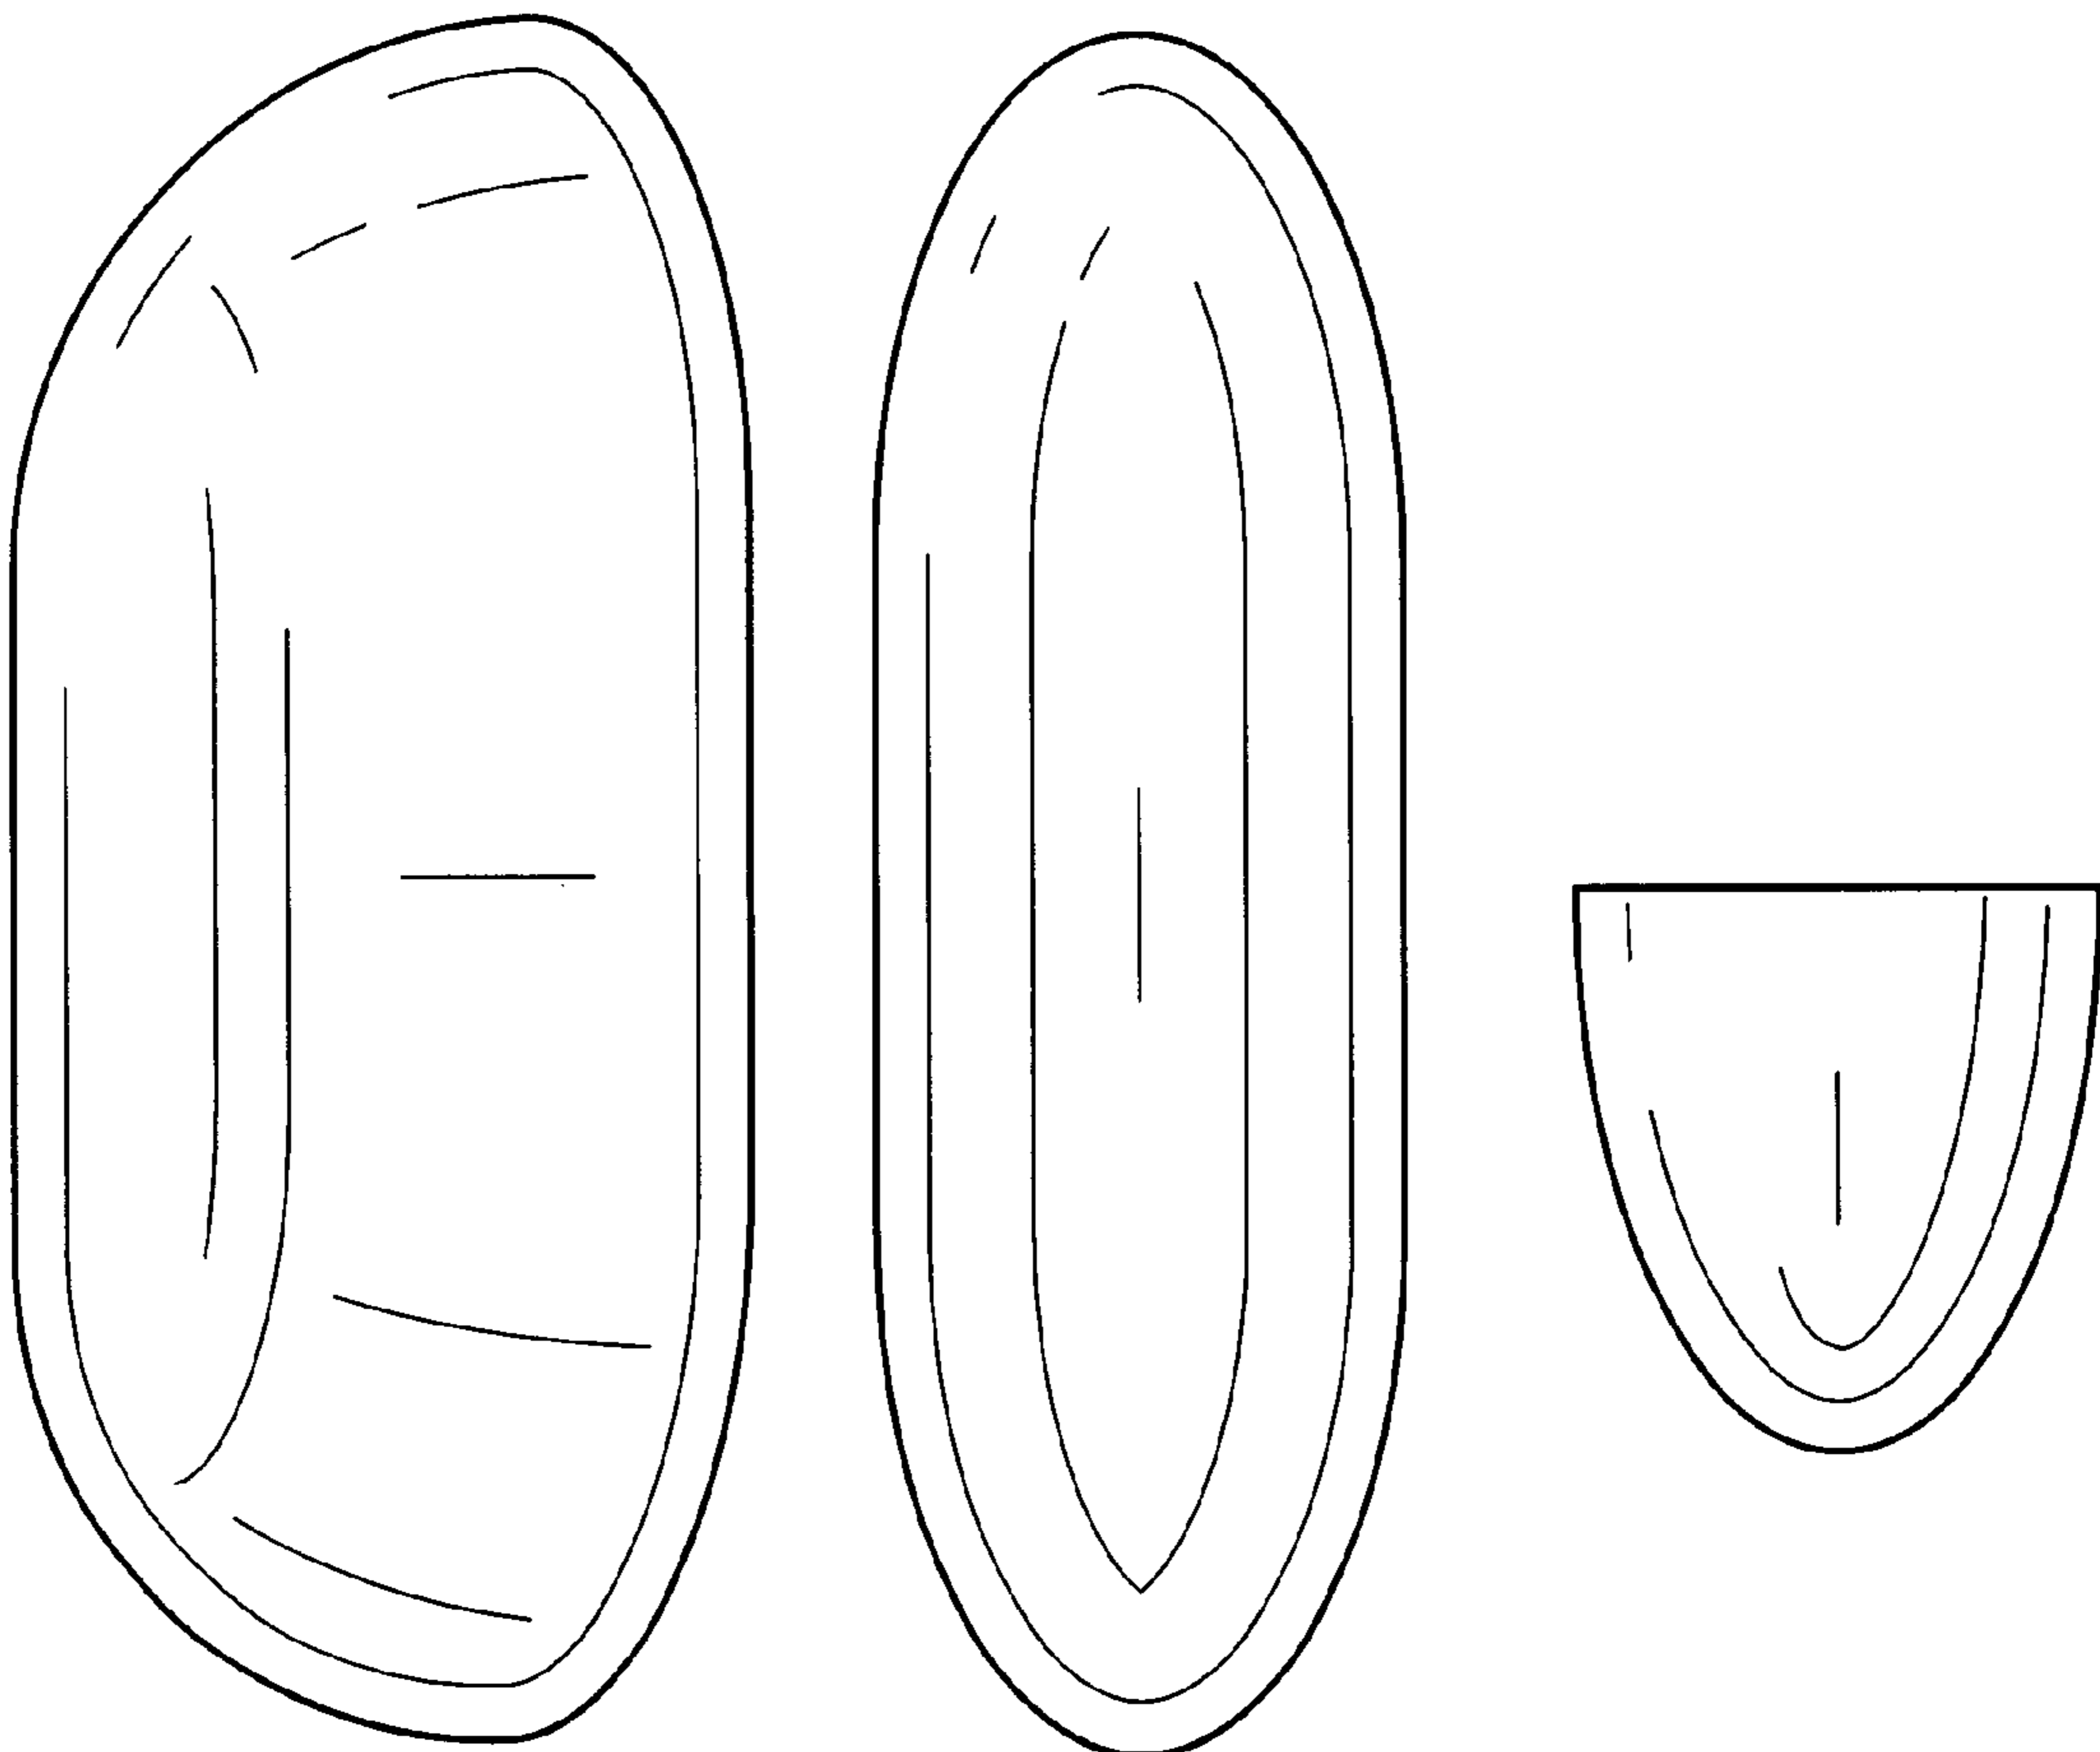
is an elevational view of our new design for a turnpiece, taken from one side.
